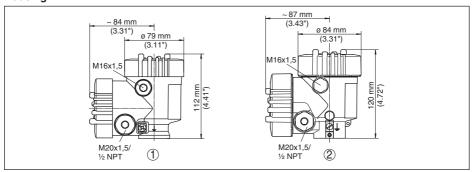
Dimensions housing (with integrated display and adjustment module the housing is 9 mm/0.35 in higher, with metal housings 18 mm/0.71 in)
